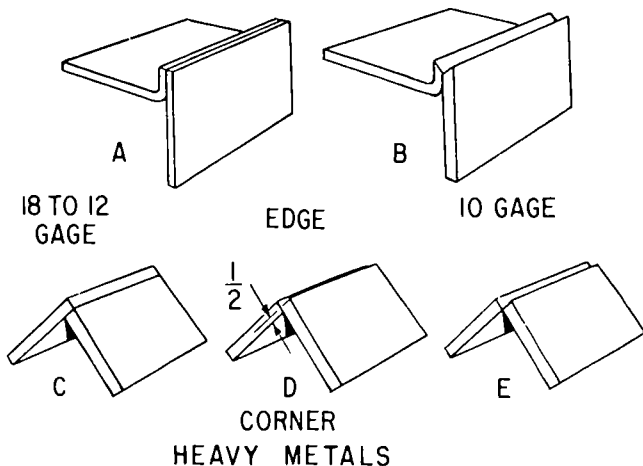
Preparation of edge and corner joints for arc welding. (A) For metals 18 to 12 gage; (B) for 10-gage metals; (C), (D), and (E) for heavier sheet.
